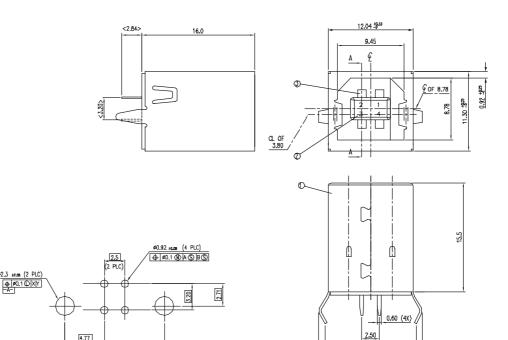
FIGURE & PCB FOOTPRINT FOR RECEPTACLE (THROUGH-HOLE)
